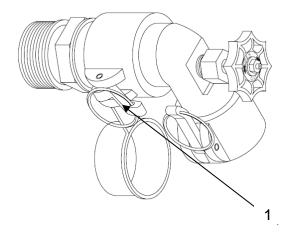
Valve coupler attached to the adapter assembly with cam arms in the locked position.
